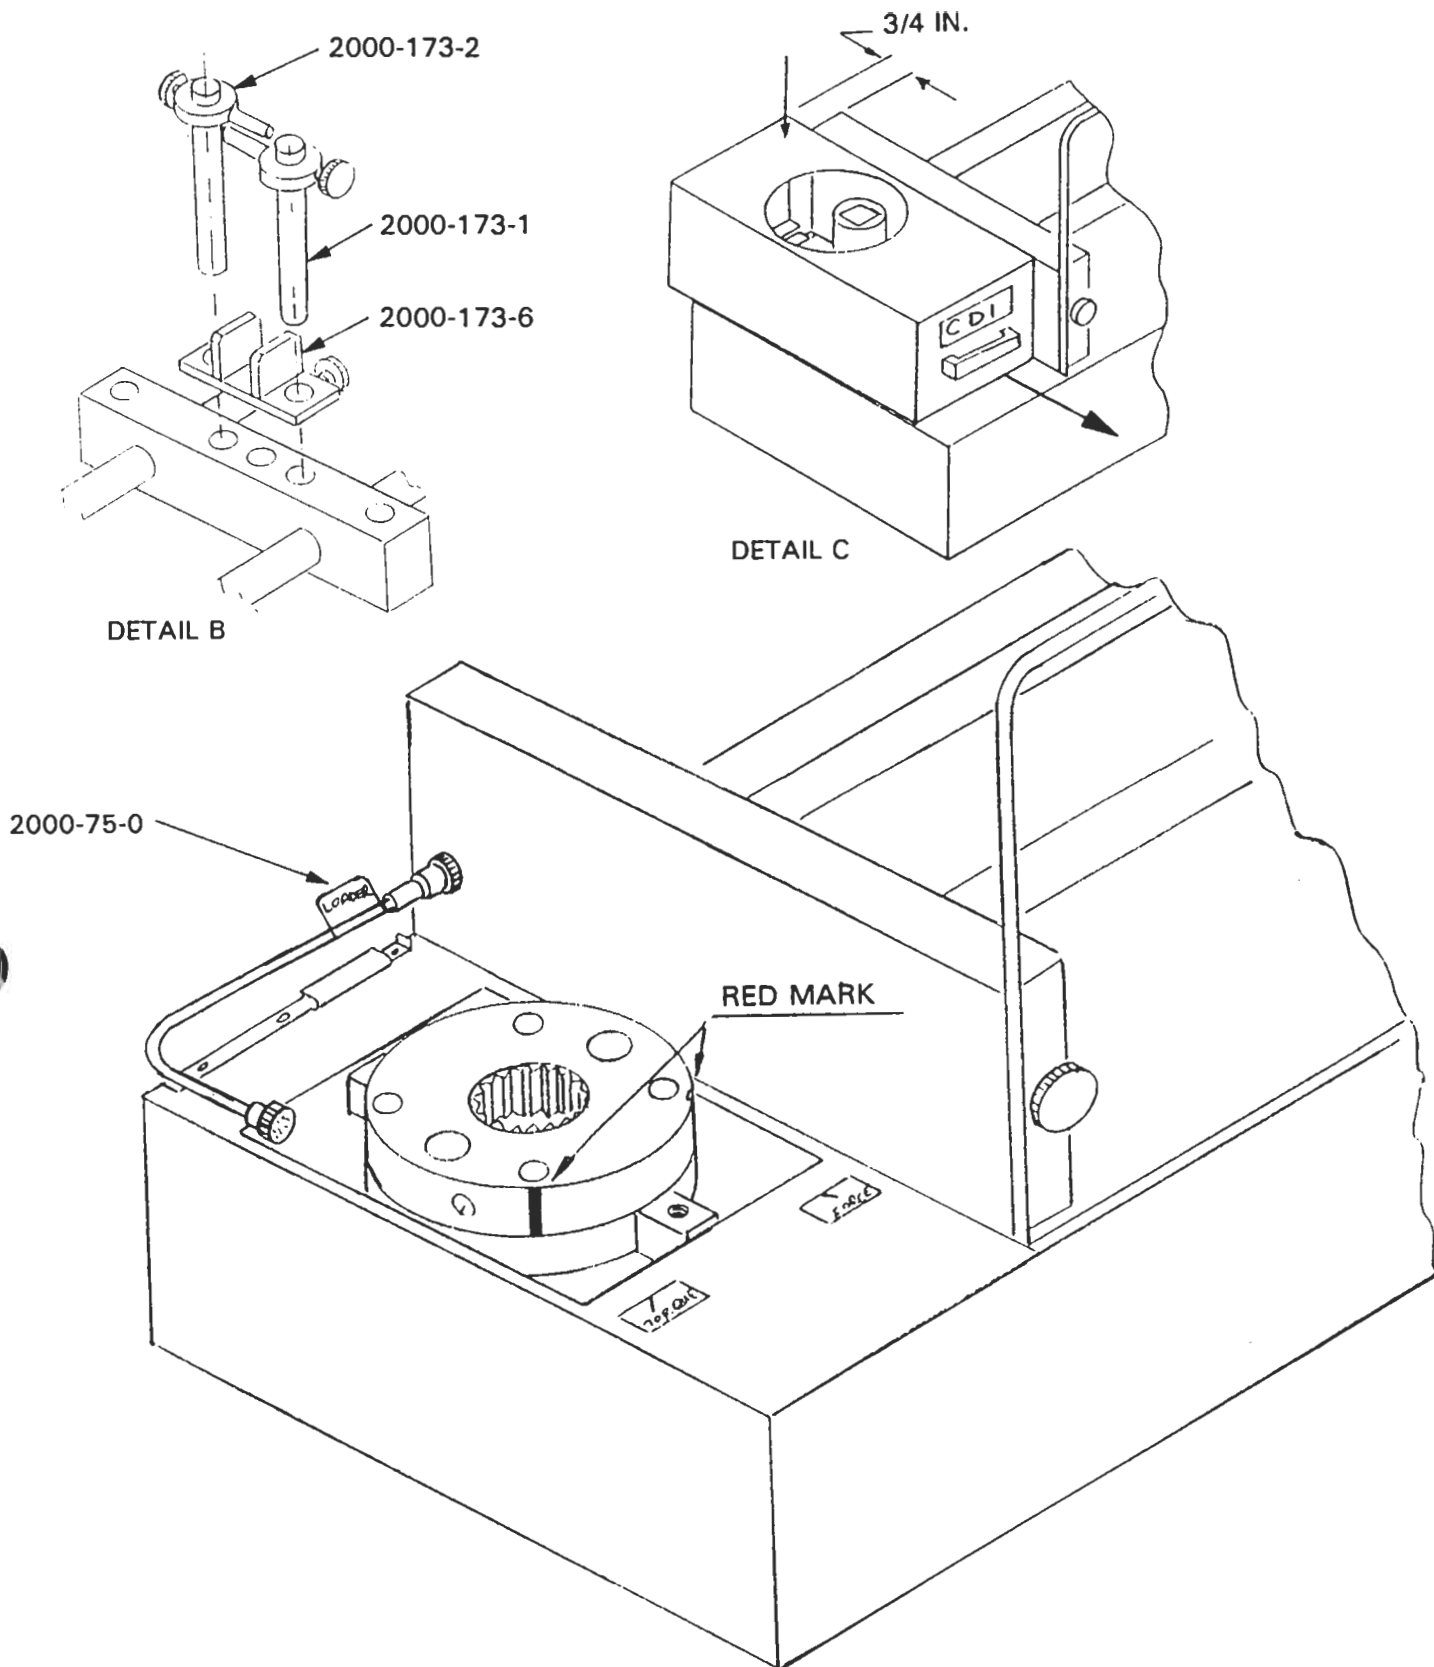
High Torque Station Test Setup for 375 In. Lb, 750 In. Lb, 125 Ft. Lb. and 250 Ft. Lb. Transducers (Sheet 3)
